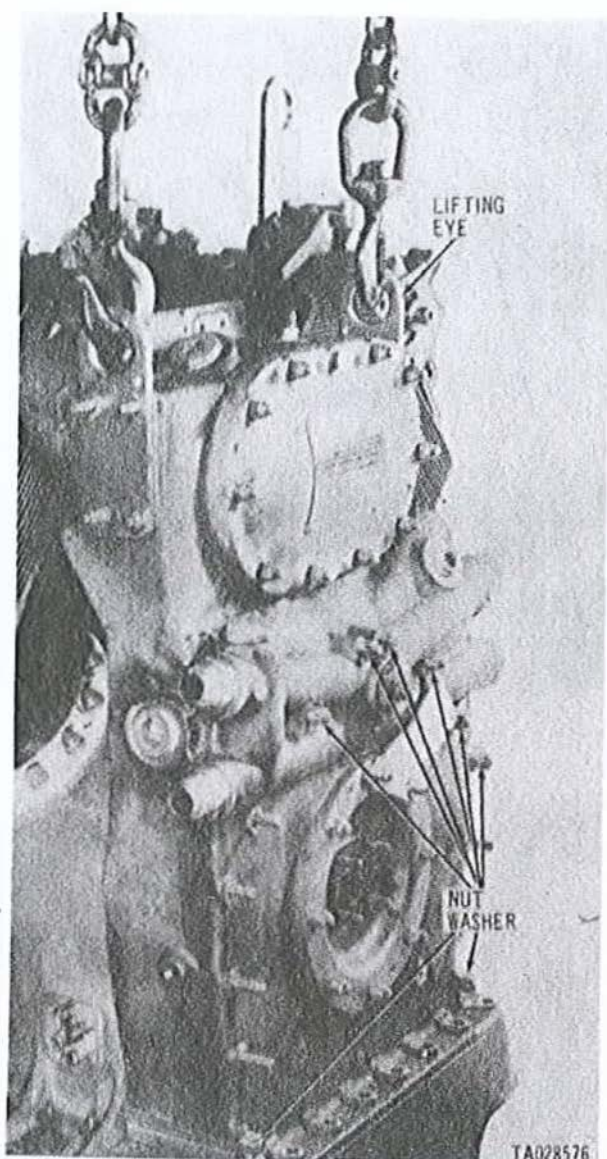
Removing or installing crankshaft damper and oil filter housing.
